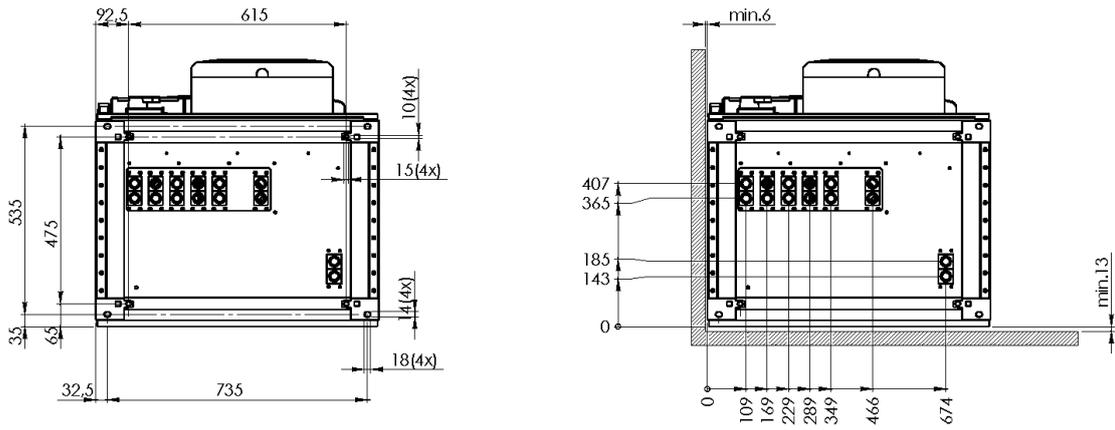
Dimensional drawings ECOsine® active FN3420-200-690-3-UL (with mounted base 100 mm)\
